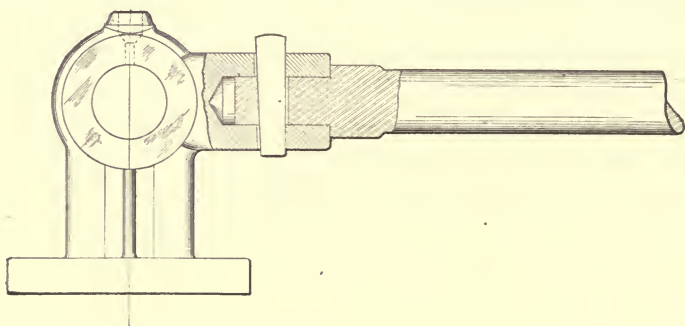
SIDE ROD AND MAIN BEARING KEYPED TOGETHER.
